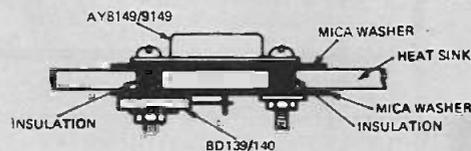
Method of assembly of power and BD139-140 transistors to the heatsink.
